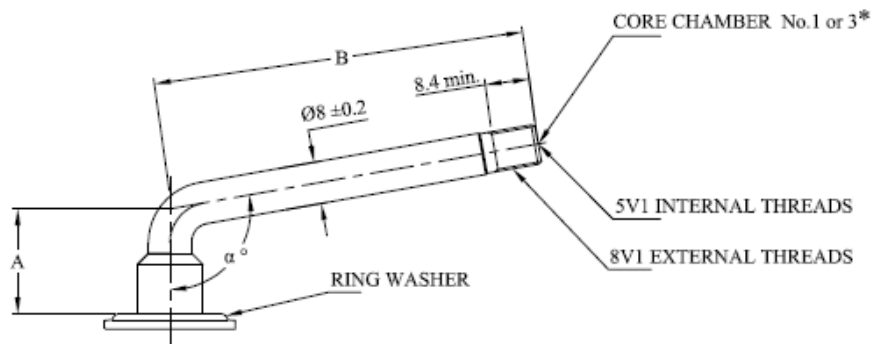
SCREW-ON UNIVERSAL TUBE VALVES HEAD SHAPE-TRUCK AND BUS VALVES
